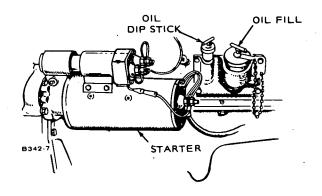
OIL FILL AND DIPSTICK LOCATIONS
